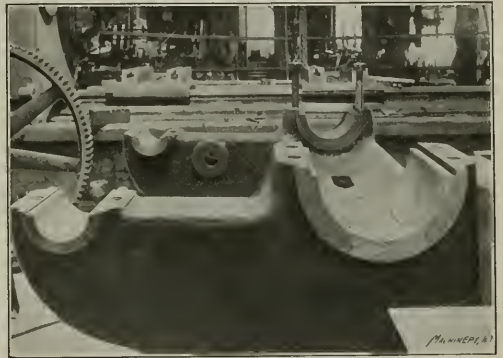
Large Headstock Framed with Cast Iron Bearings. Note Oil Groove.
